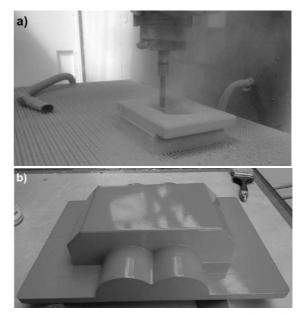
Production of mold for autoclave process: a) milling mold on CNC device, b) ready mold, covered with release agent
